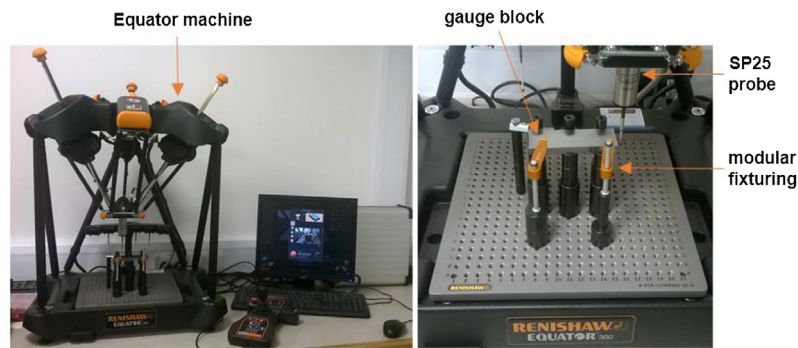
Test setup on Equator gauge for gauge block inspection.
